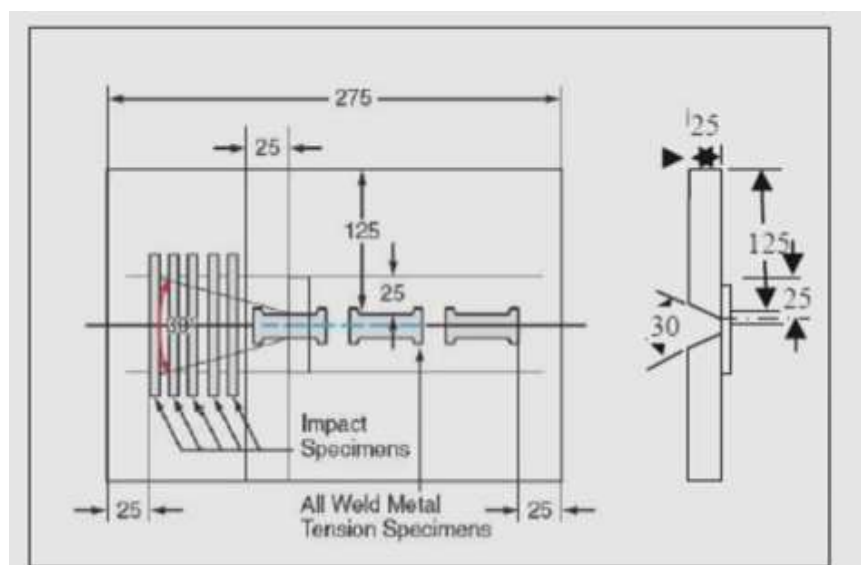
Dimensions of tensile test and Impact test assembly in mm as per ASME SFA 5.17
